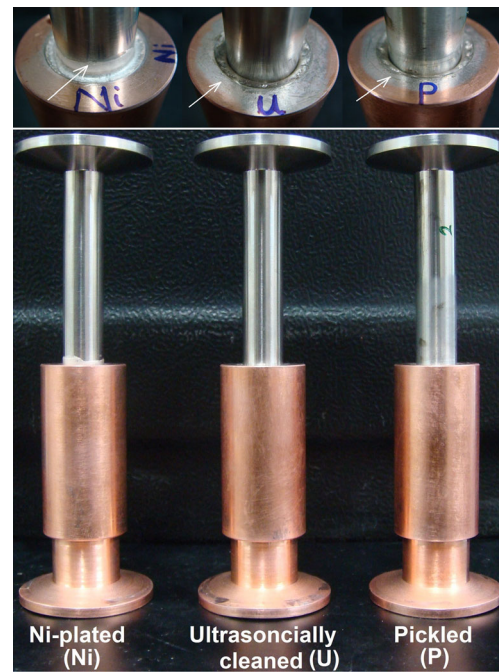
Vacuum brazed and helium leak tested OFE Cu-316L stainless steel specimens. Inset at top shows magnified view of the brazed joint region; the spread of braze filler metal is marked with arrows
